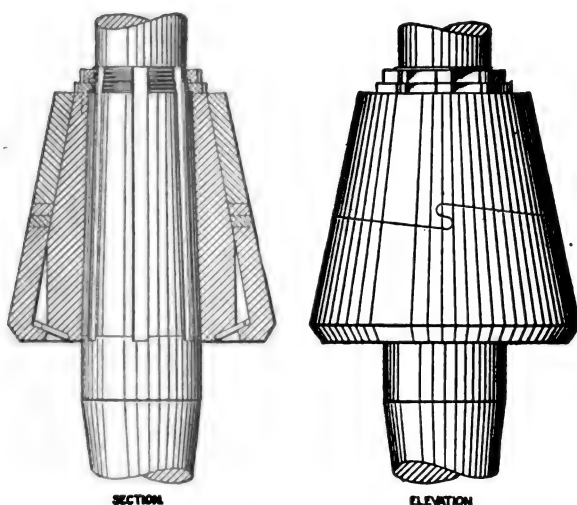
REMOVABLE HEAD FOR GYRATORY CRUSHER.
